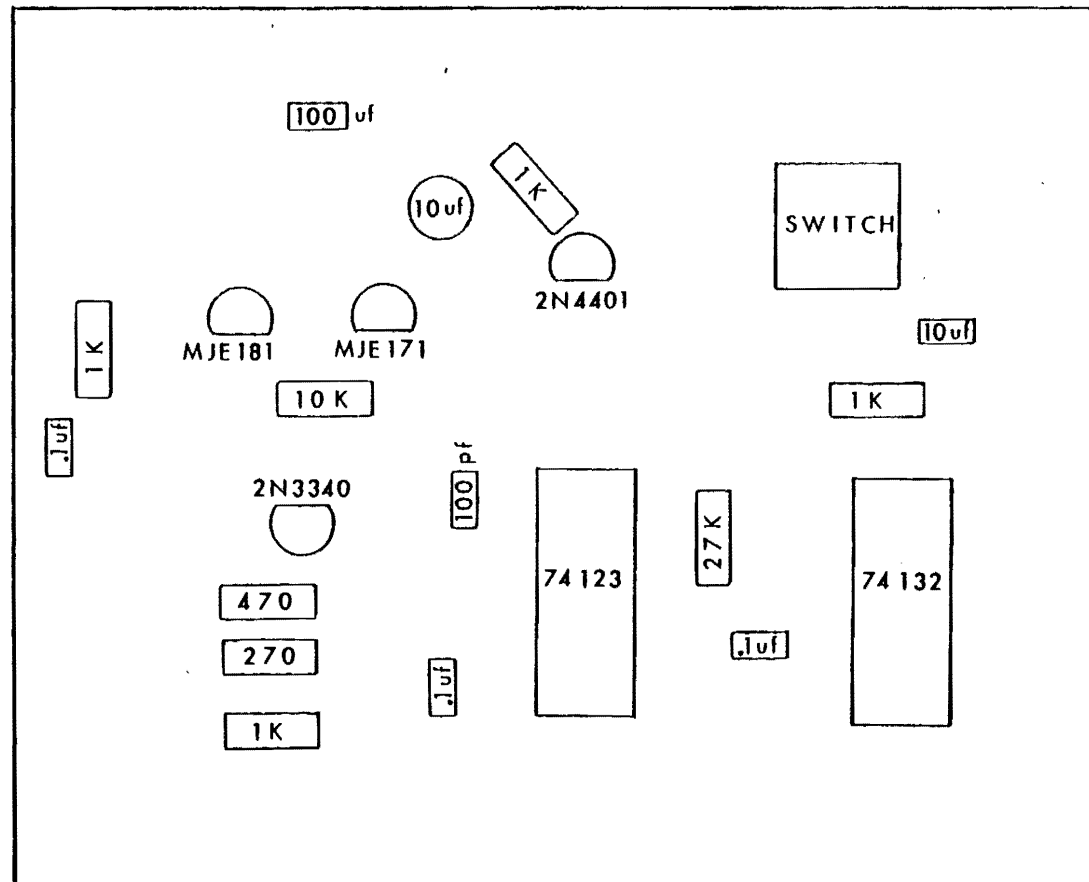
Transponder Pulser Printed Circuit Card Component Placement.
